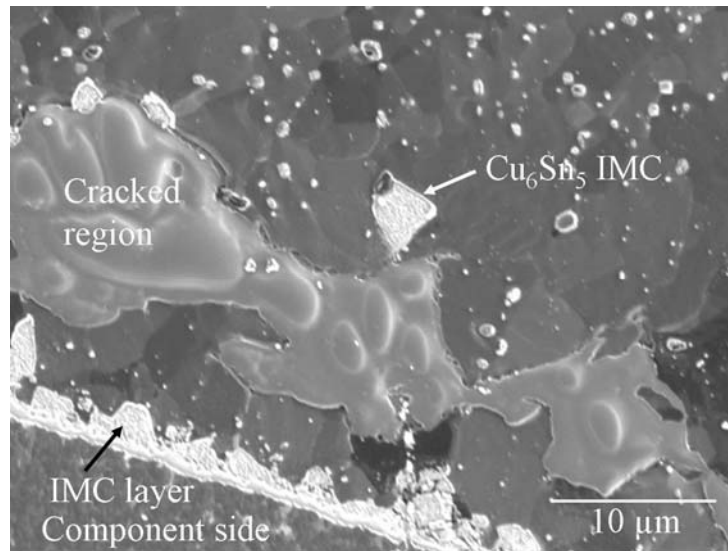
Ion image from FIB showing crack location on the component side for lead-free solder joint (Image shows the presence of Cu_6Sn_5 IMC in the bulk solder)
